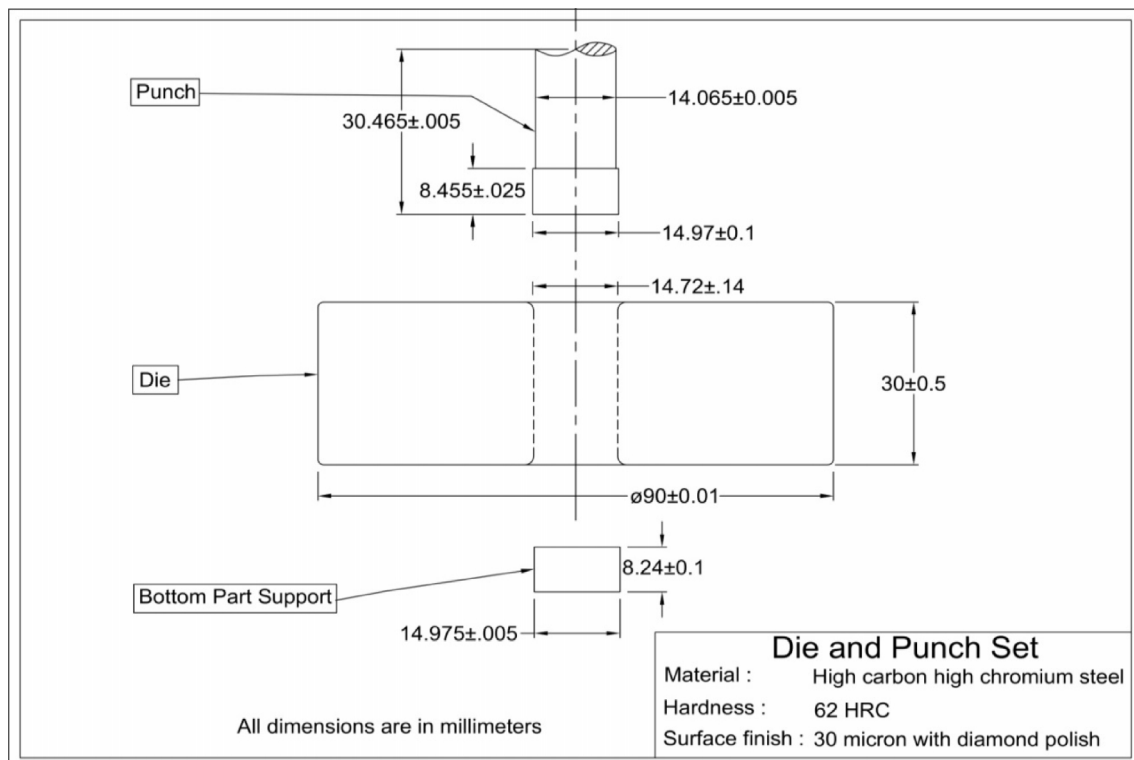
Sketch of the die and punch set used to fabricate cylindrical preform
